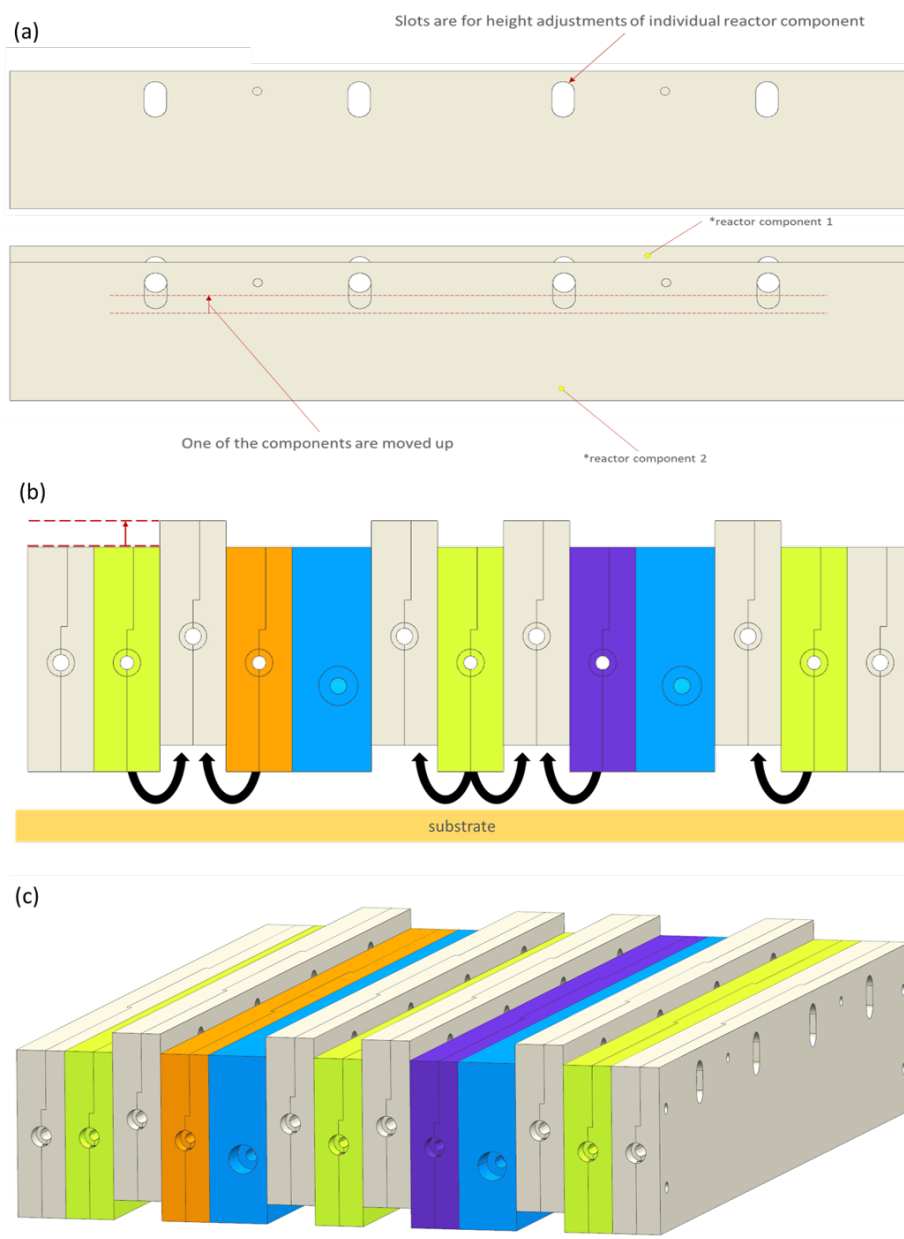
(a) A side view of a reactor head component and the interspaced elevation adjustment between two components. (b) A front view of the reactor head with adjustable interspaced elevations for different reactor components. (c) An isometric view of the reactor head.
